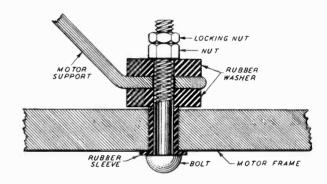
In order to keep the vibrations of the rotating motor away from the motorboard, rubber is used between the motor support and the motorboard as indicated.
